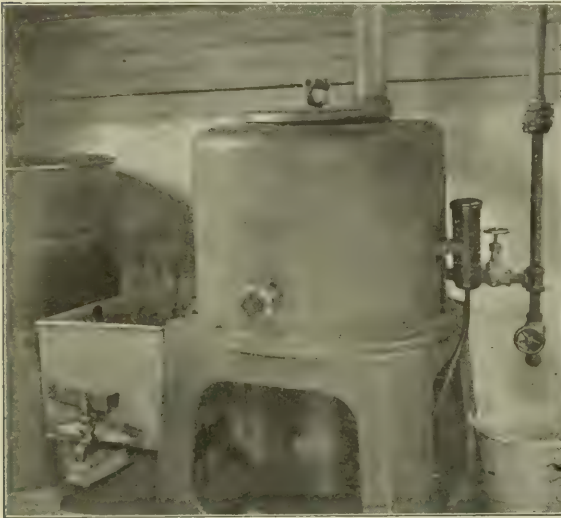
Machine for Cleaning Journal Box Packing and Reclaiming the Oil.
